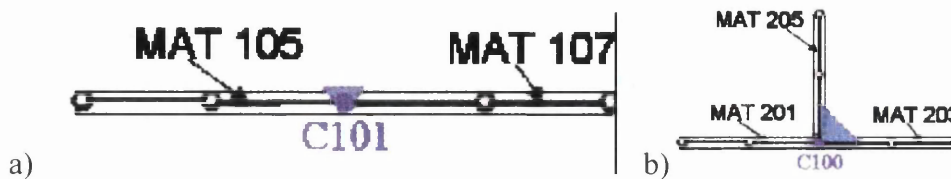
Example of a) Butt Weld, b) T – Joint
